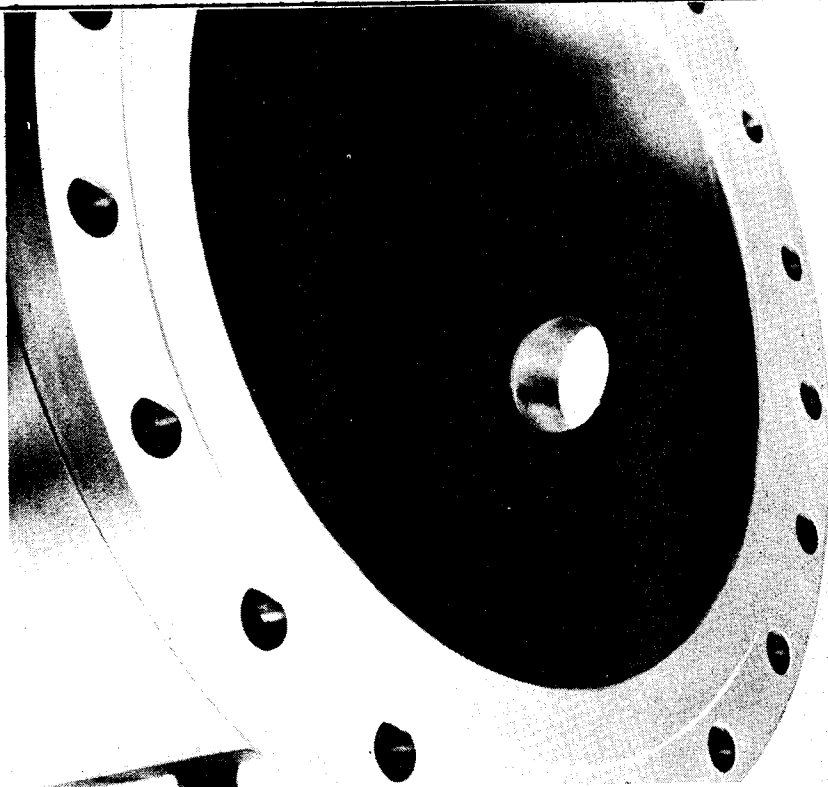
Flanged end of wet lay-up laminate protected 36 inch diameter steel vessel.
